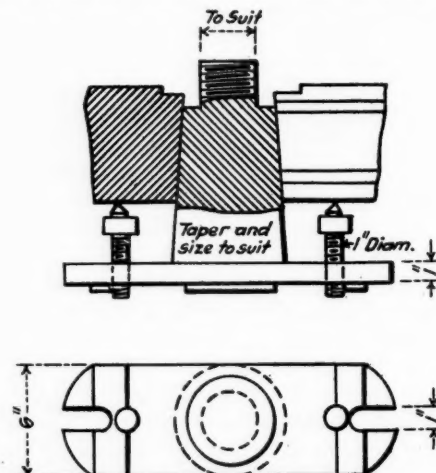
Mandrel for Machining Piston Heads on a Boring Mill.
